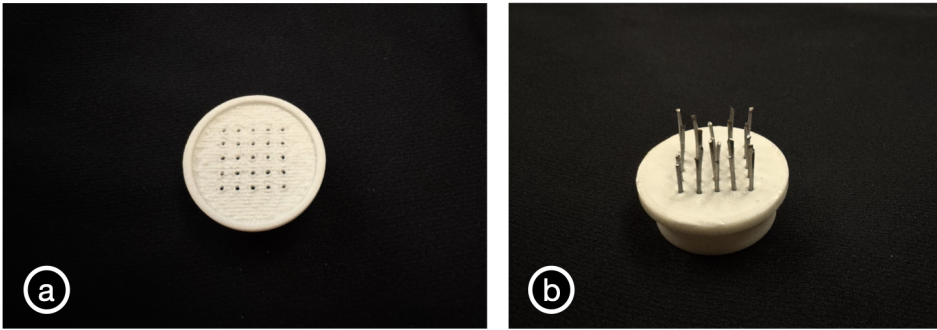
Prototype fabrication process: (a) 3D-printed air chamber cover; (b) liquid silicone rubber layer with inserted metal wires to form orifice openings.
